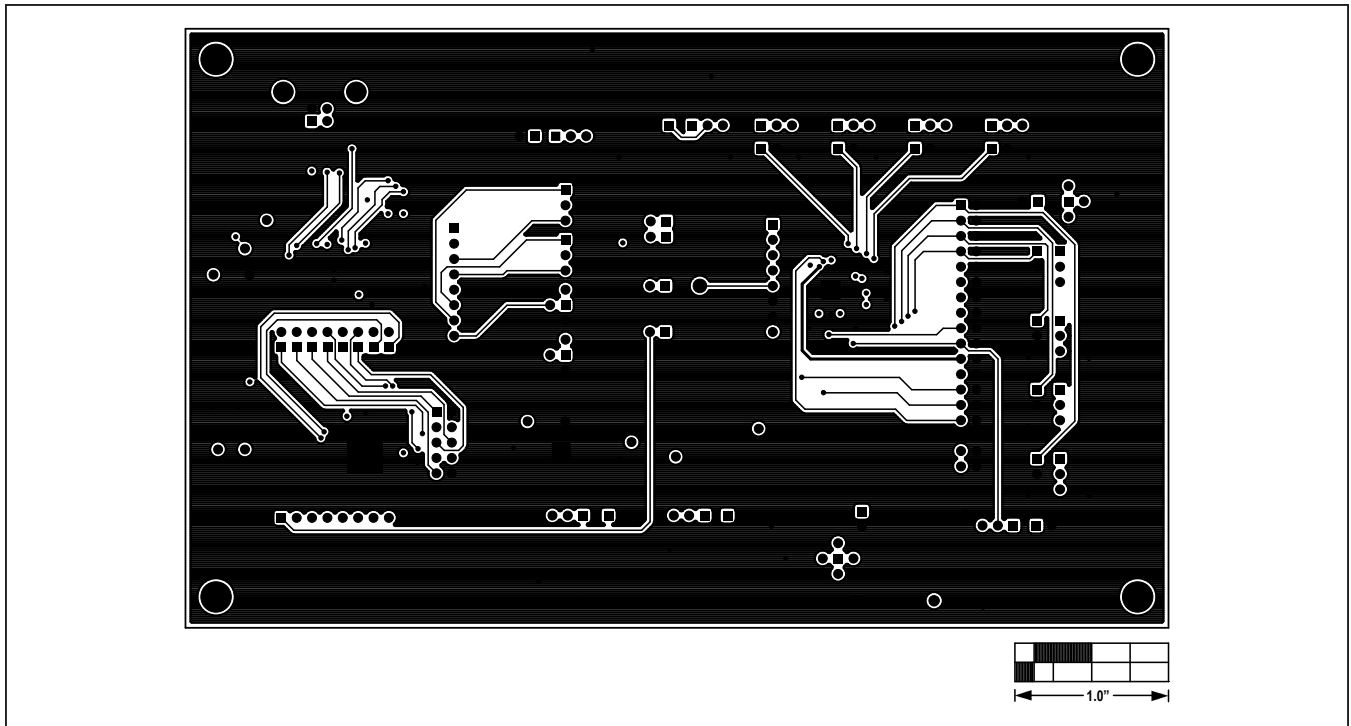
MAX5110 EV Kit PCB Layout—Solder Side
